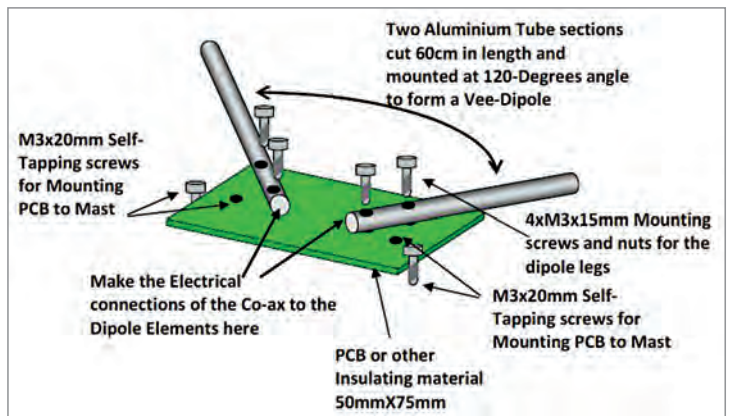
The mounting and mechanical assembly details of the Vee-dipole
